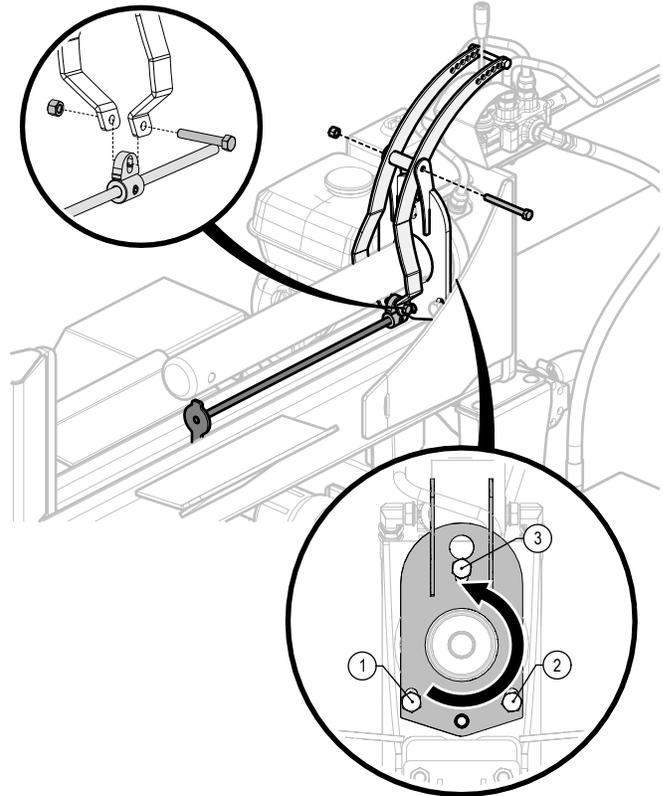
Rod Adjusting Collar assembled to Trip Lever
